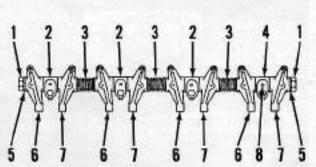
View showing four cylinder engine rocker arm assembly. Three and six cylinder assemblies are basically arranged the same.
